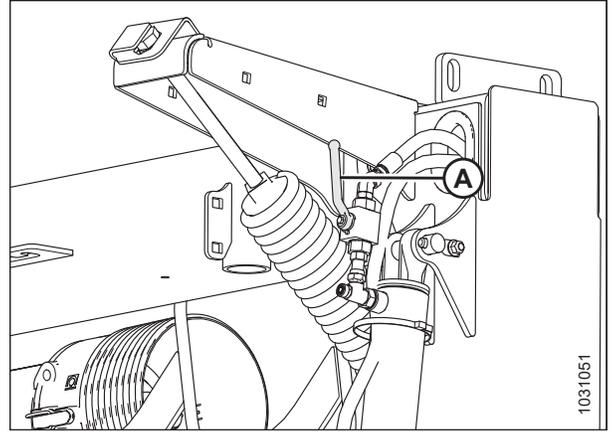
Cylinder Lock-Out Valve – Open Position
